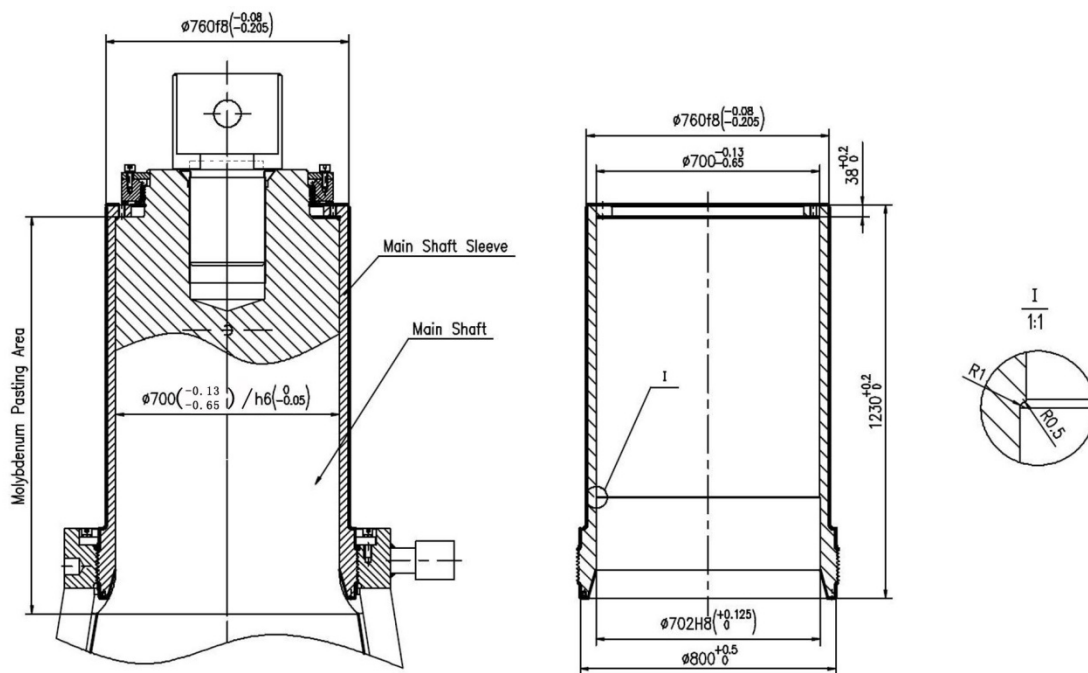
Installation dimension of mainshaft and its sleeve
